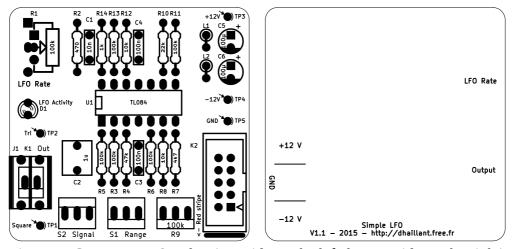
Components Overlay (Top side on the left, bottom side on the right)
